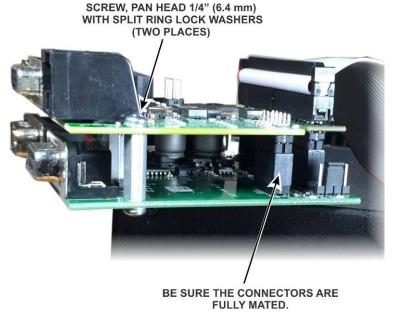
TX Monitor Module Mounted on the P3 I/O Board.
